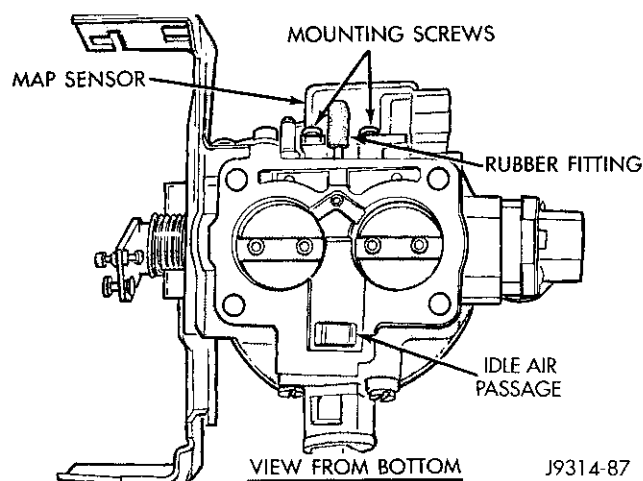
Throttle Body Air Control Passage—3.9L/5.2L/5.9L Engines
